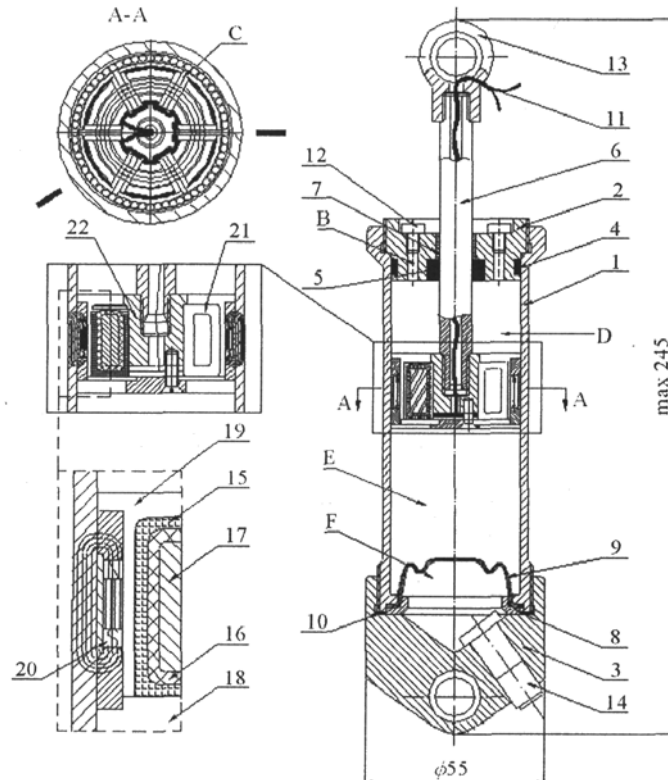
Structure of the damper: 1 – housing, 2 – upper cover, 3 – lower cover, 4 – cover seal, 5 – shaft sealing, 6 – shaft, 7 – guiding element, 8 – pressing ring, 9 – diaphragm, 10 – ring-shaped sealing element, 11 – coil wire, 12 – threaded corks, 13 – shaft holder, 14 – dosing and cutting-off valve, 15 – coil electric insulation, 16 – coil, 17 – coil core, 18 – lower piston cover, 19 – upper piston cover, 20 – permanent magnet, 21 – fastening plate, 22 – coil housing, A-A piston cross-section, B – opening for MR fluid dosing, C – radial-shaped gap for MR fluid flow, D – space inside the damper on the shaft end, E – space inside the damper on the diaphragm side, F – space under the diaphragm
